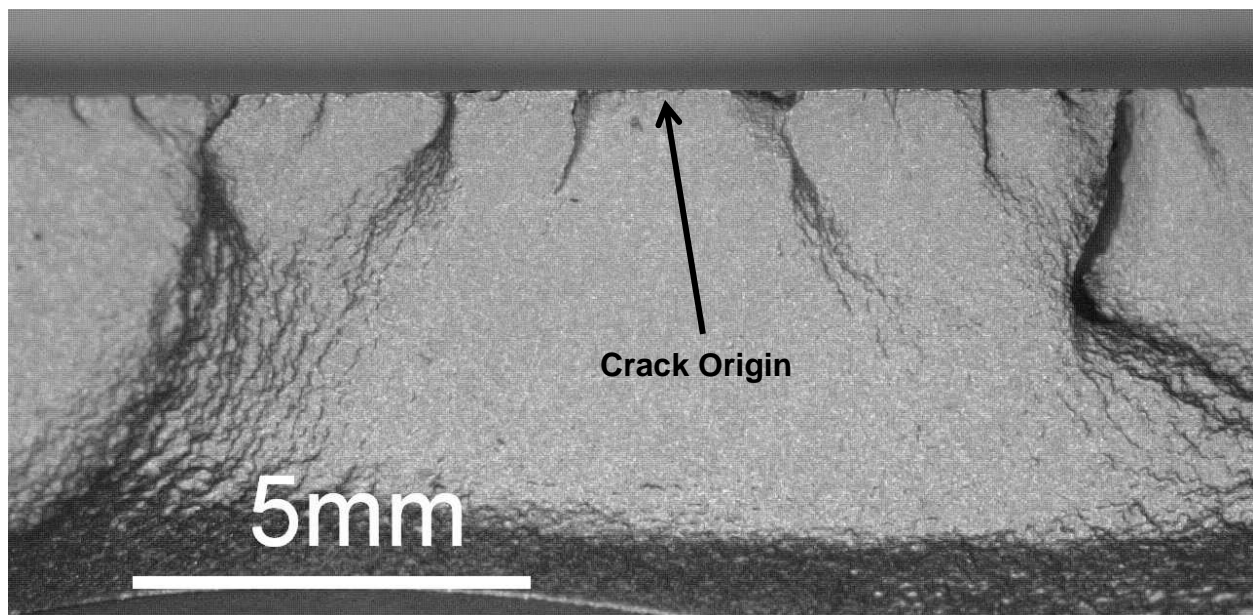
Fracture Surface View of Crack Origin (PT0735)
